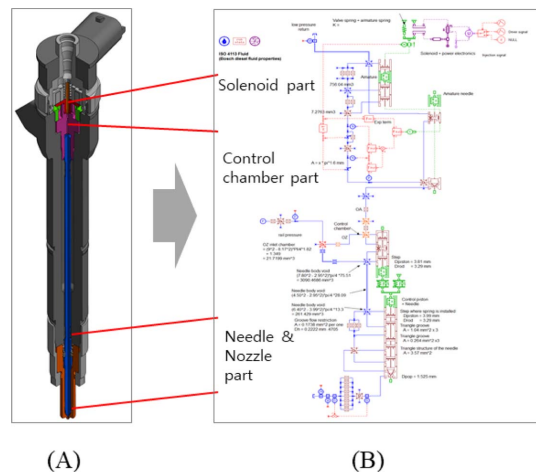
3D drawing from precise measurement (A), early AMESim model for silicone molding method (B)
